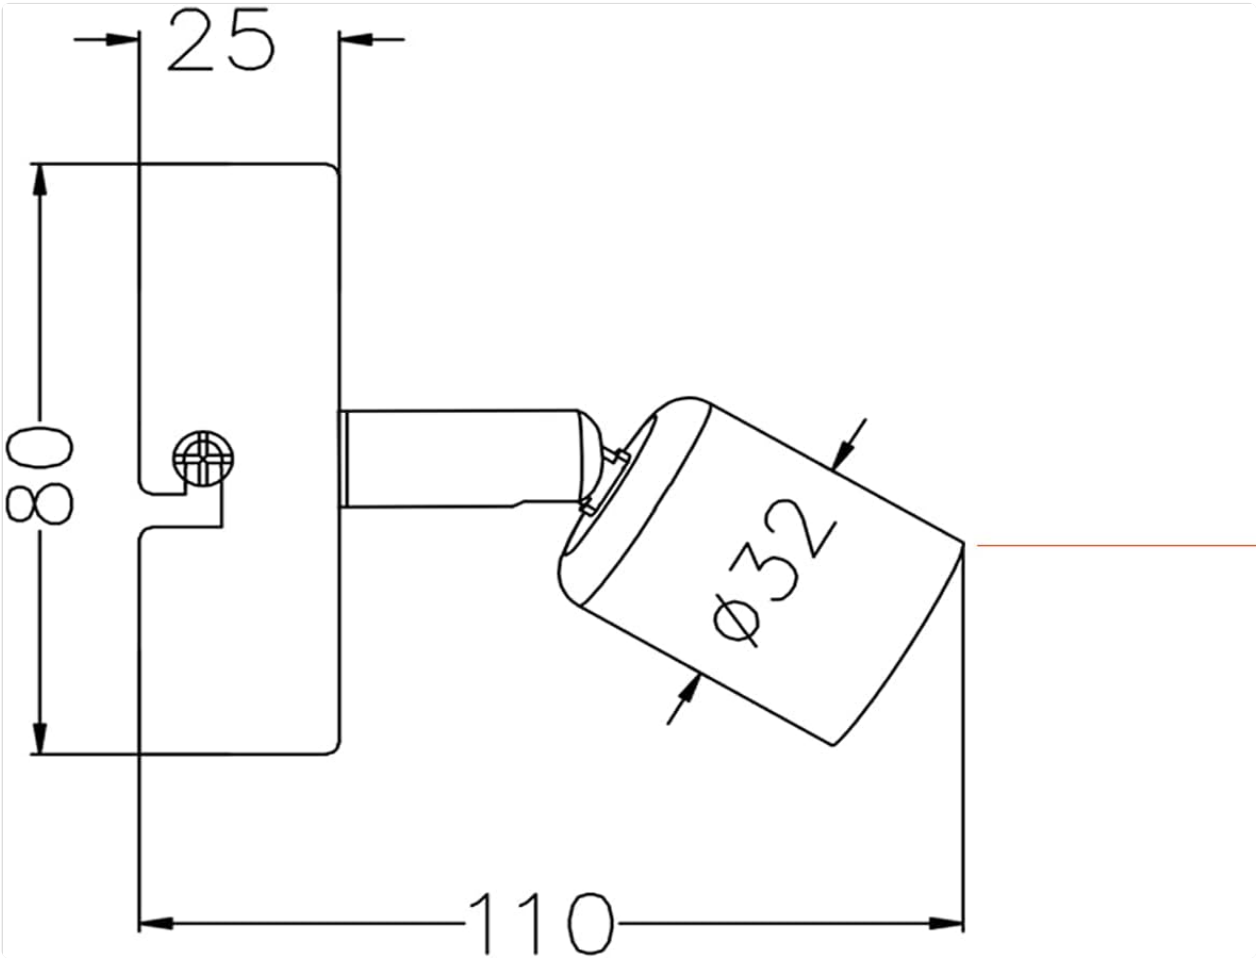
Technical drawing showing the dimensions (in mm) of the wall spot light.
